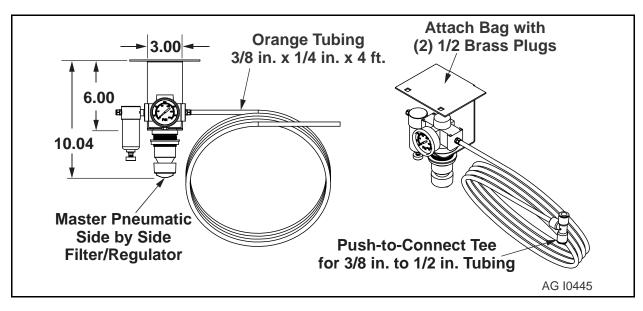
1 Air Control Assembly Kit (Filter/Regulator)
